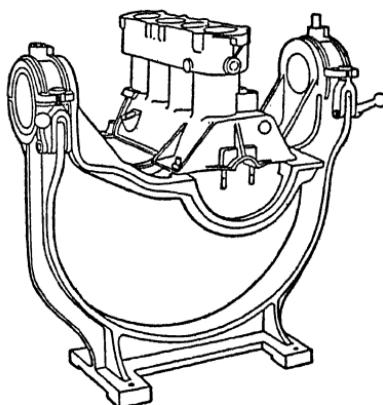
Mechanics in the Better Shops Use an Engine Stand for Mounting the Engine When Repairing It
